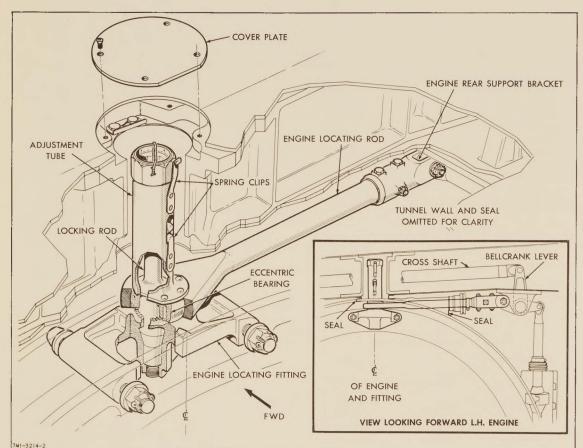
ENGINE LATERAL ALIGNMENT FITTING
